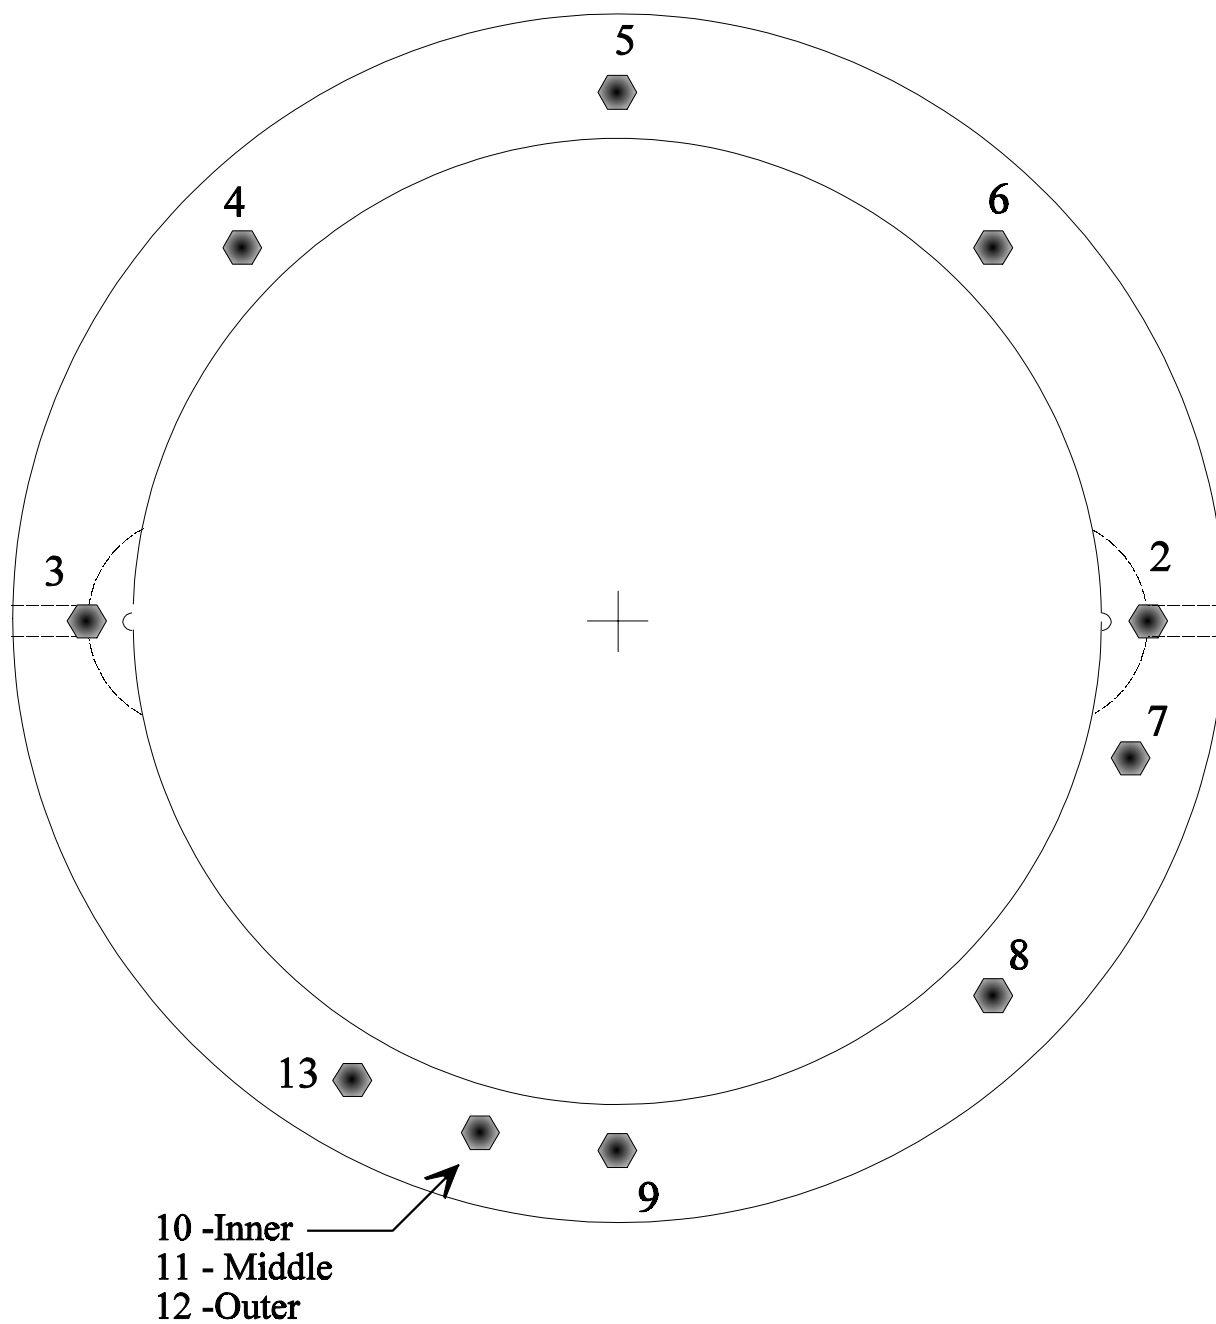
Two Axial Groove Bearing Thermocouple Locations
